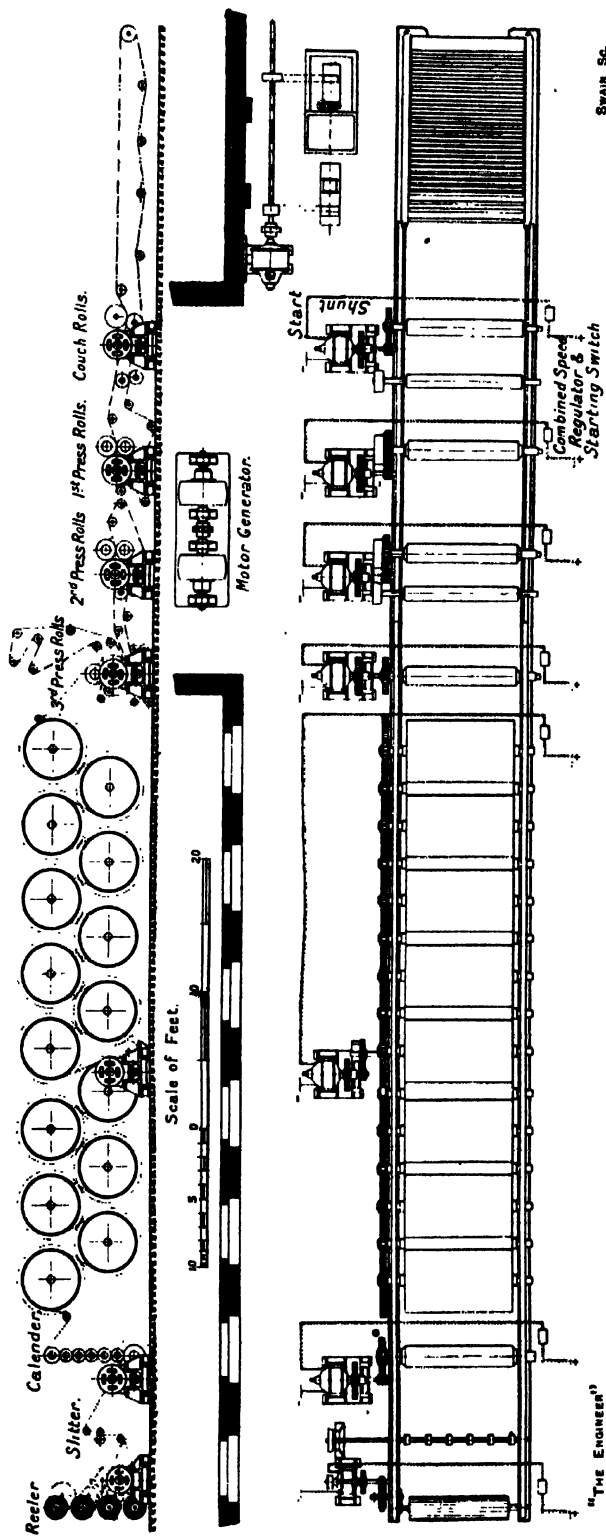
Electrically Driven Machine—Bertram and Happer System.
